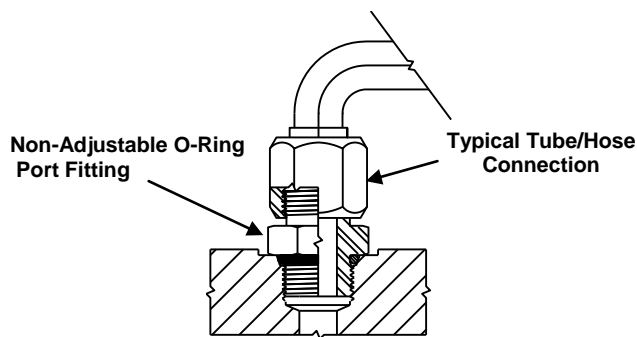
Typical Non-Adjustable Stud End O-Ring Port Installation
